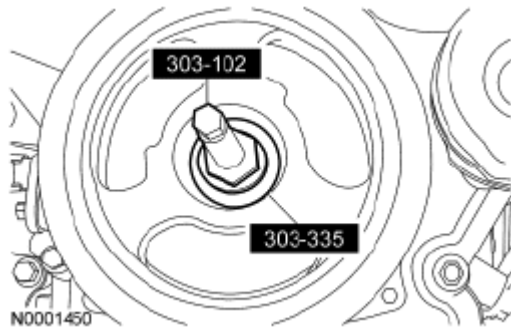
Identifying Front Cover Oil Seal Installer & Crankshaft Vibration Damper Installer
